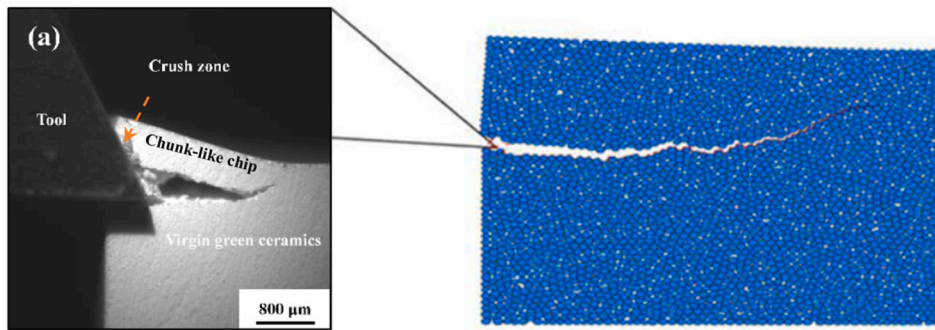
Orthogonal cutting of unsintered aluminum oxide: Machining test (left), simulation using DEM (right) [34].
